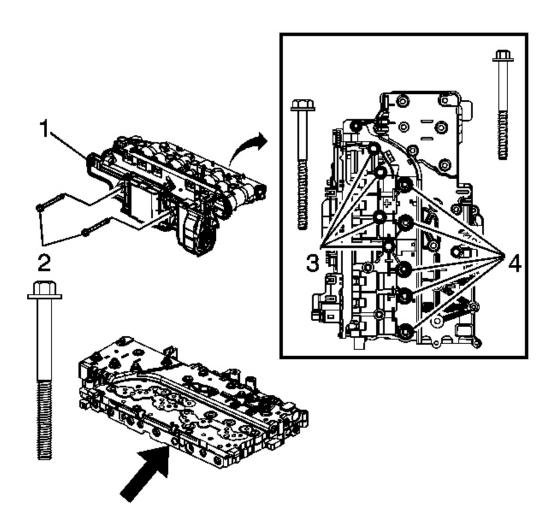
View Of Control Solenoid Valve Assembly Bolts Courtesy of GENERAL MOTORS CORP.
